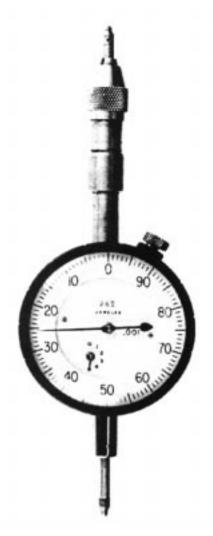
Assembled Internal Taper Gauge for  $4^{1}/_{2}$ -in. OD and Larger Pipe
